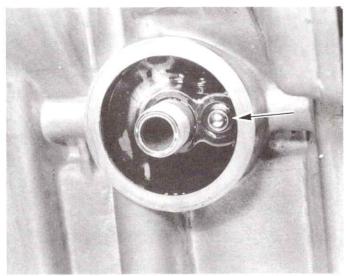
Correct assembly of regulator spring (Sec 9)
